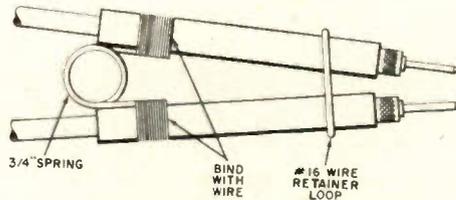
Tweezer assembly can be fastened by securing electrode holders to torsion spring.
